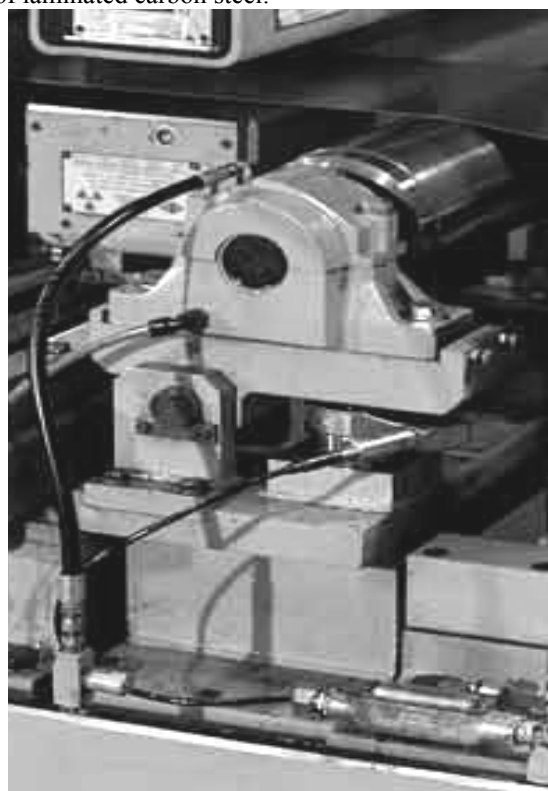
Accelerometers mounted on back-up of the cold rolling mill, (in the equipment laboratory), for vibration measurement
